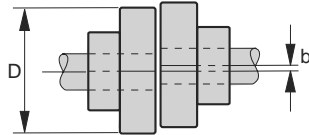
Mounting dimensions of the Nor-Mex E coupling
